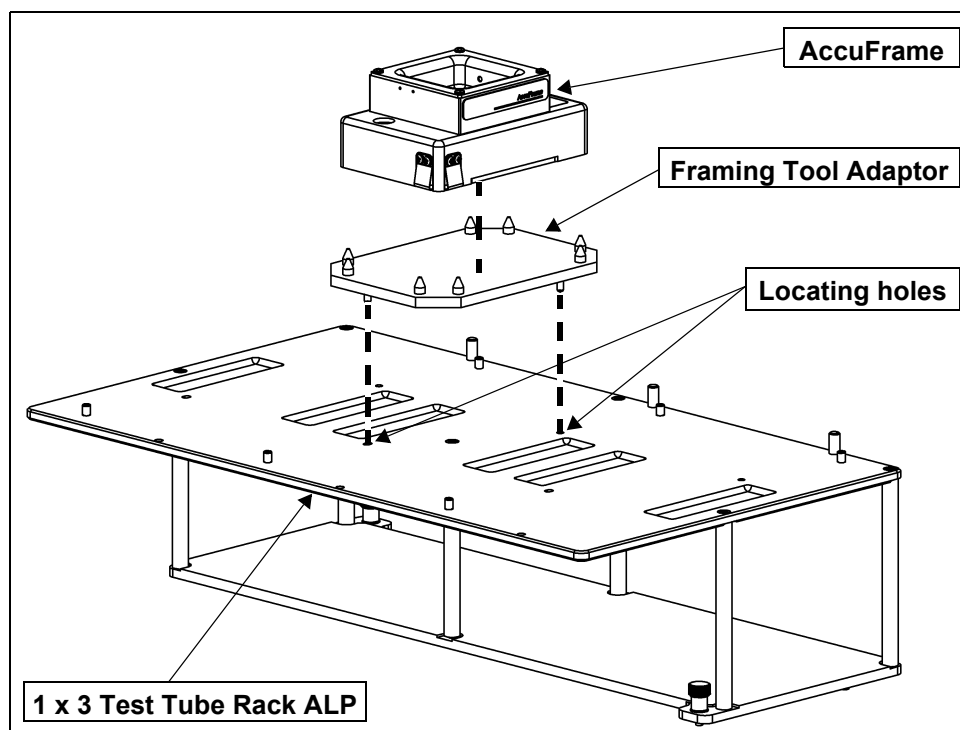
Framing for the 1 x 3 Test Tube Rack ALP (left facing)
